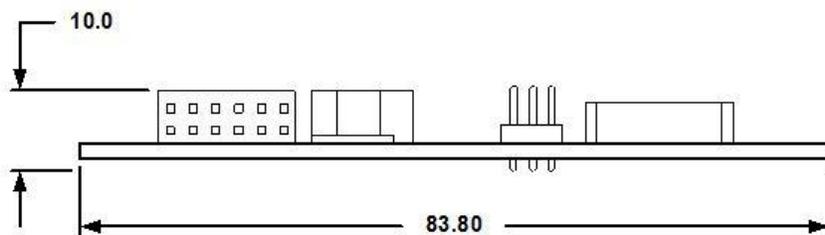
2701 Dimensions: Side View (CTR-270100-IT-RSU-00R)
